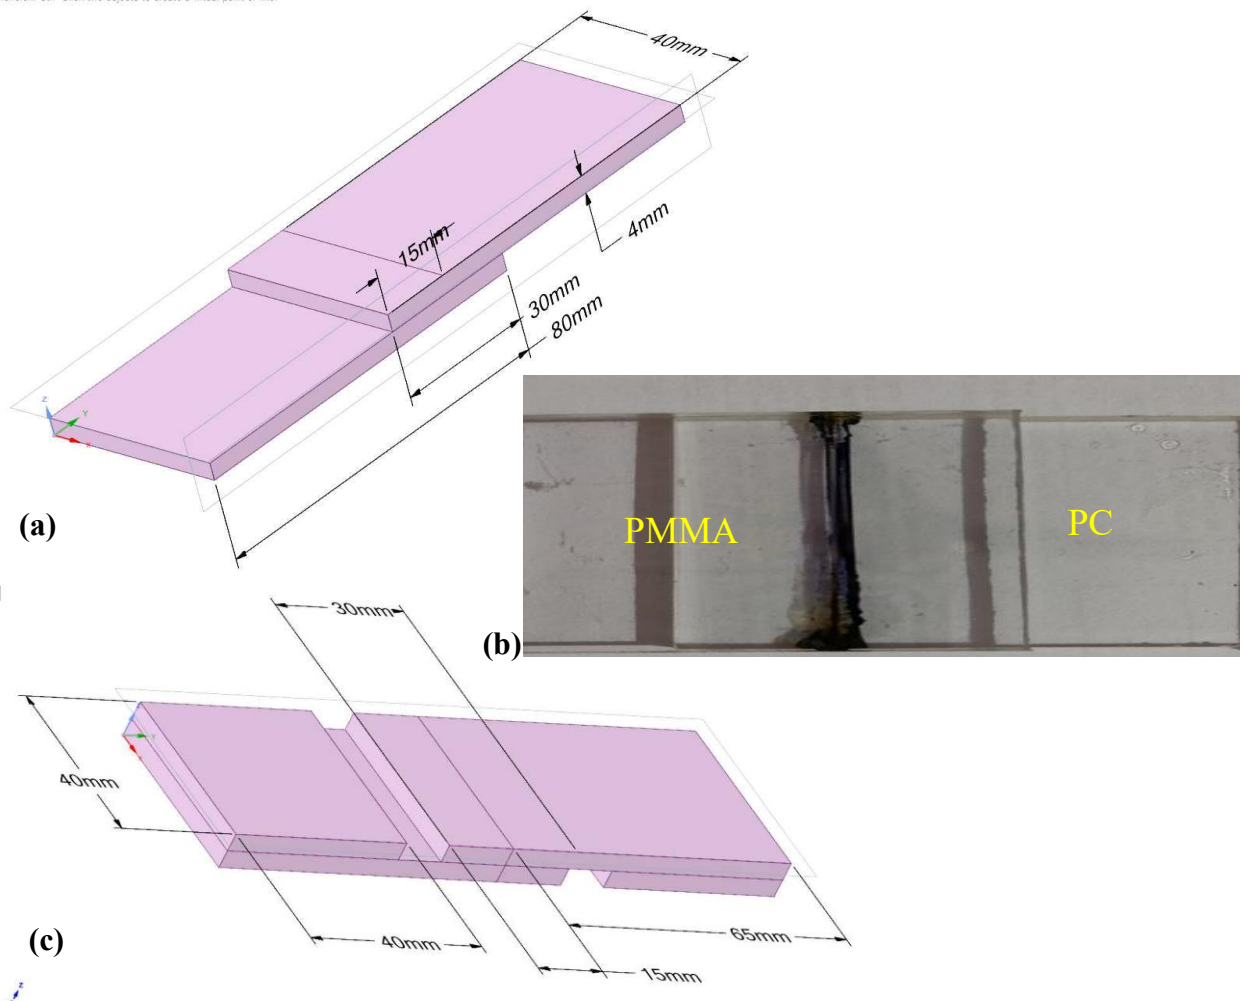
(a) Schematic, and (b) pictorial view of the welded sample, and (c) the schematic view of the tensile test specimen
